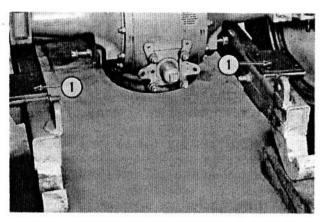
LOADER SIDE FRAMES DISCONNECTED FROM REAR AXLE HOUSINGS
